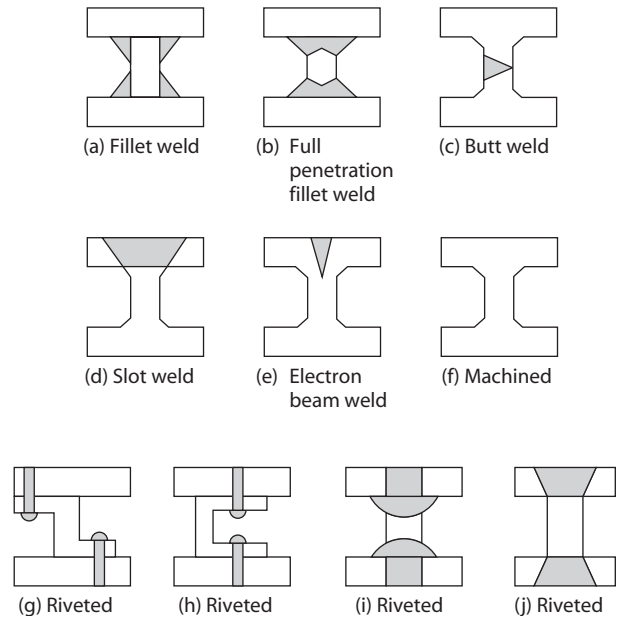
Several fabrication techniques for centrifugal impellers.
